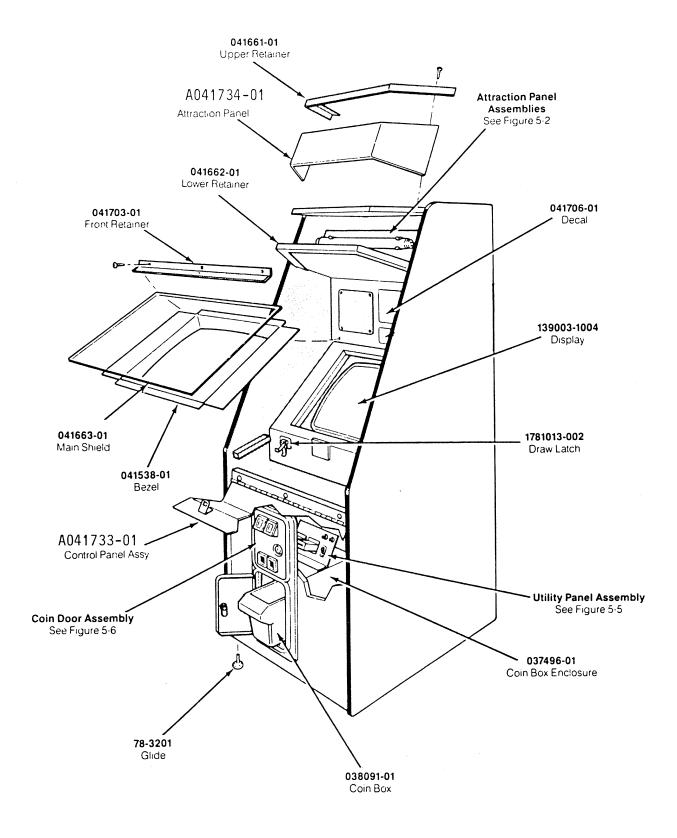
Cabinet-Mounted Assemblies A041650-01 A
